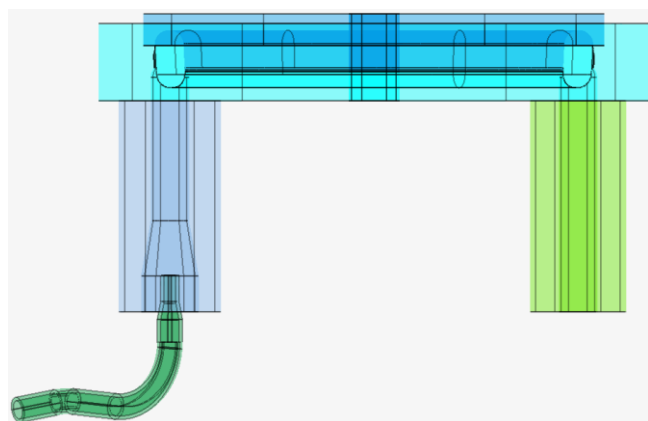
3D CAD geometry of the prototype of piston gallery with its injector nozzle.
